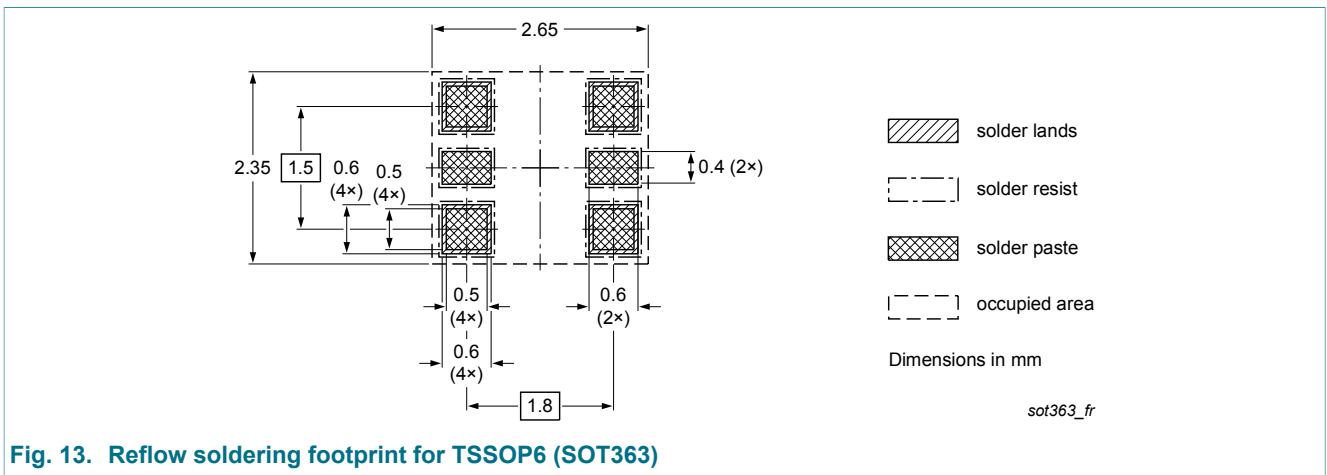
Reflow soldering footprint for TSSOP6 (SOT363)
